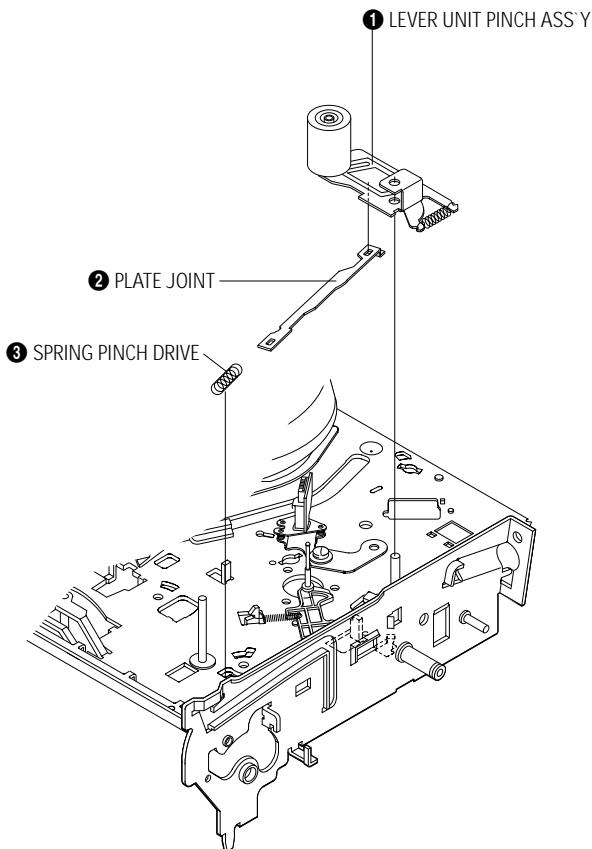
Lever Unit Pinch Ass'y, Plate Joint, Spring Pinch Drive Removal
